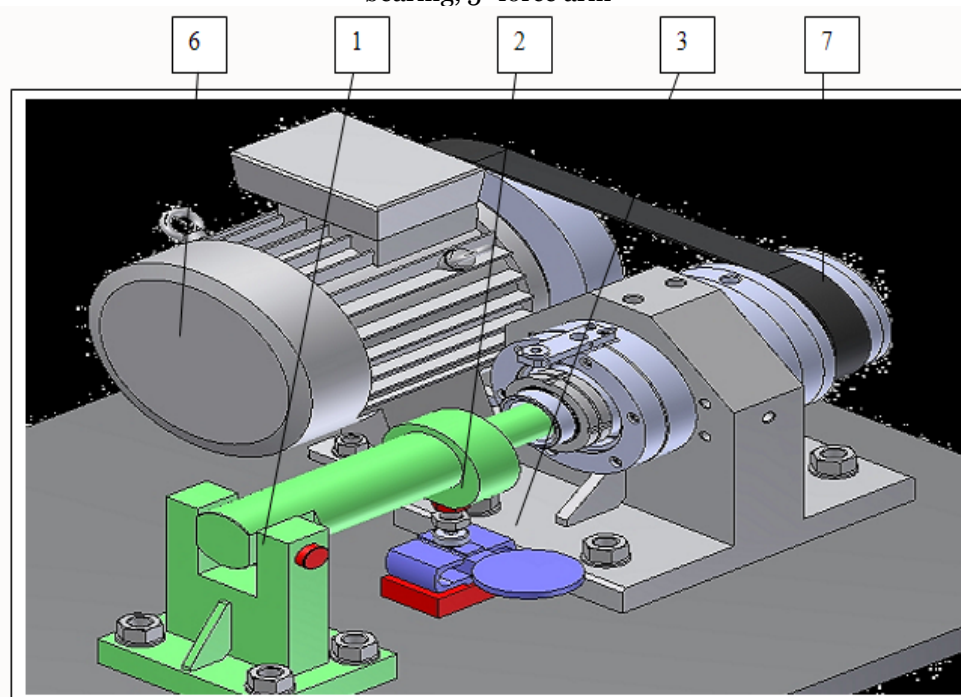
D model of experimental stand, 1- holder, 2- to retighten screw, 3- dynamometer, 6- drive, 7- Poly V belt
